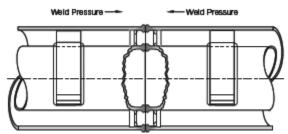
Bring pipe ends together and apply welding pressure.
